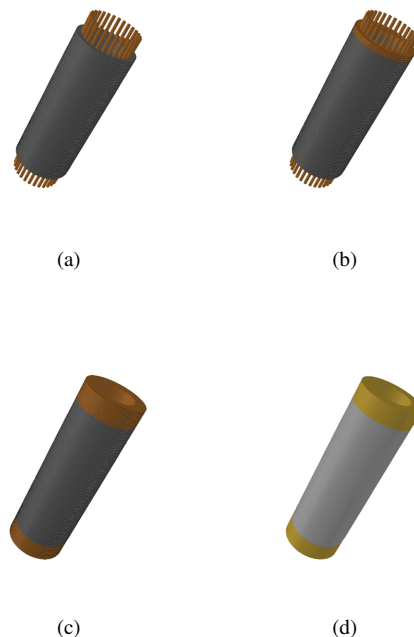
Rotor assembly of a deep well submersible motor: copper bars with ferromagnetic laminations (a); some (b) and all (c) of the copper sheets of the end-ring and its final copper liquid soldering plus the paint coating (d).
